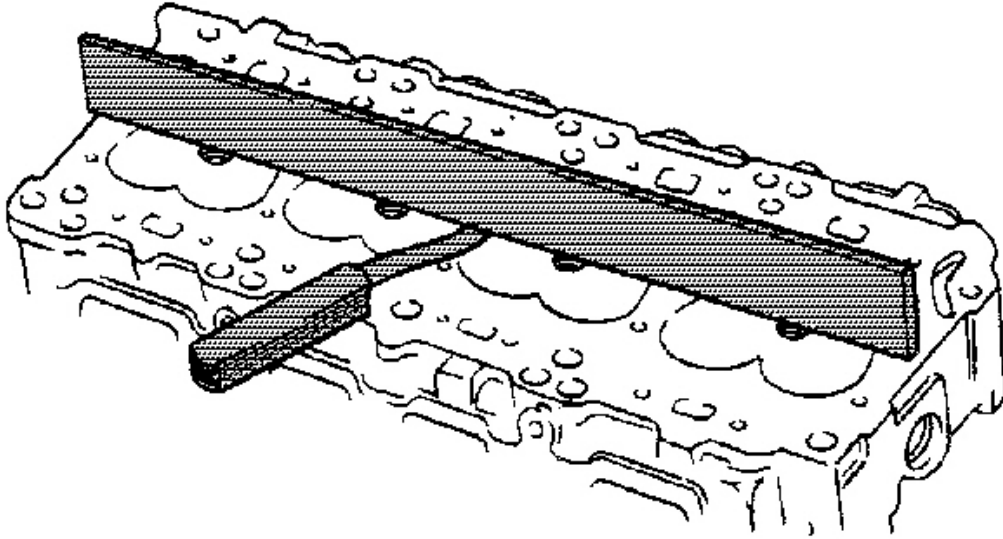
Inspecting The Cylinder Head Deck Surface For Flatness
